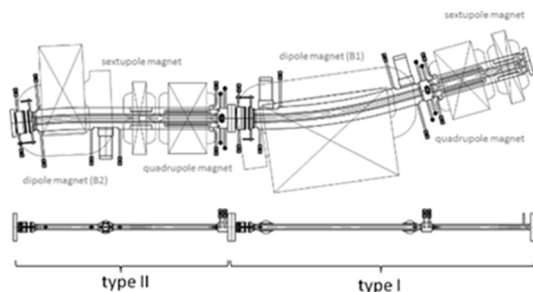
Layout of the DR beam ducts in one cell of the reverse-bend FODO lattice[4].
